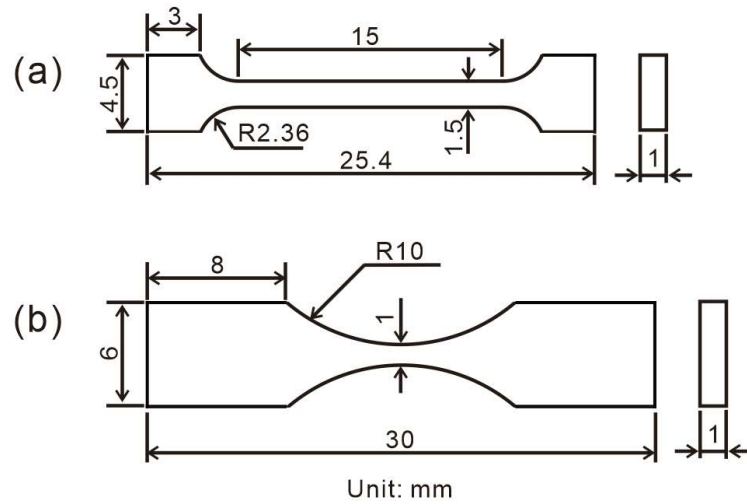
The dimensions of specimens used for (a) regular tensile tests and (b) fatigue tests.
